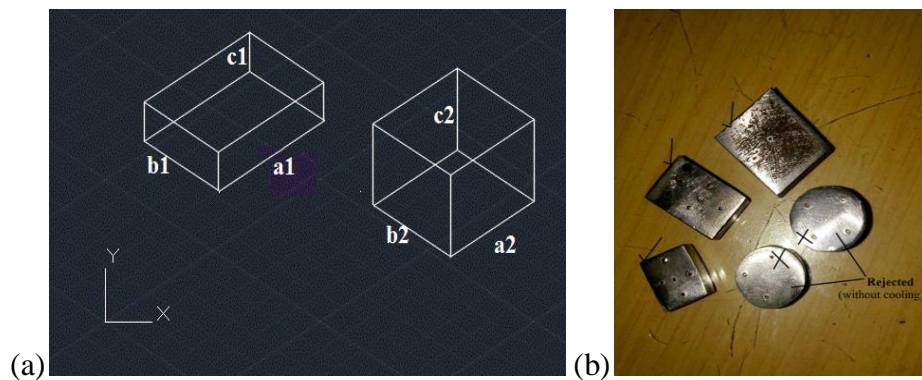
Two steel pieces (a) AutoCAD drawing, and (b) Actual images
